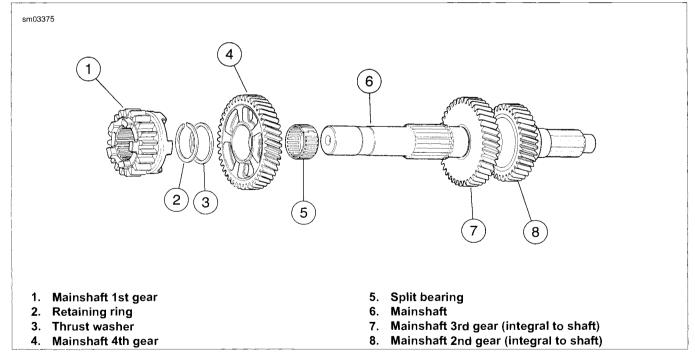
Transmission Mainshaft Assembly Once Removed from Left Crankcase/Disassembly
